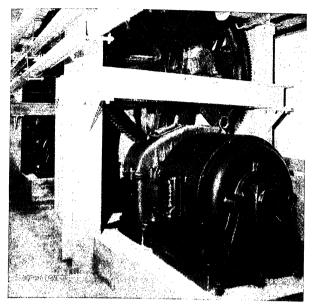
Drive of a 60"-mixing and warming mill. (Three-phase, squirrel-cage, 110-kW motor.)
